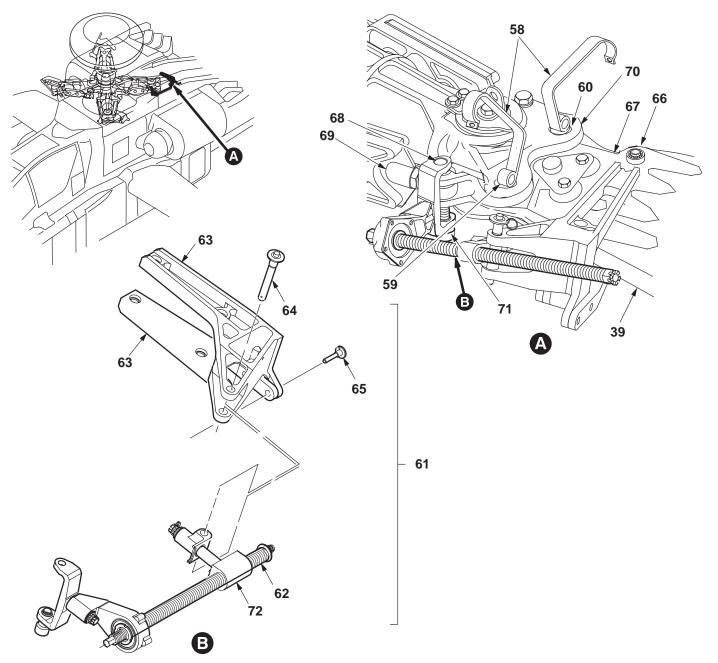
Blade Positioning Assembly on L/H AFT Main Rotor Blade
